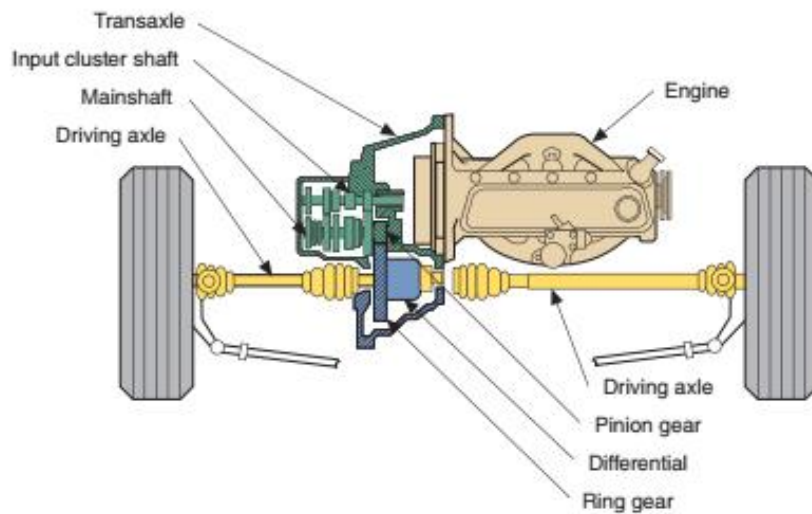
The location of typical front-wheel-drive transaxle drivetrain components.
